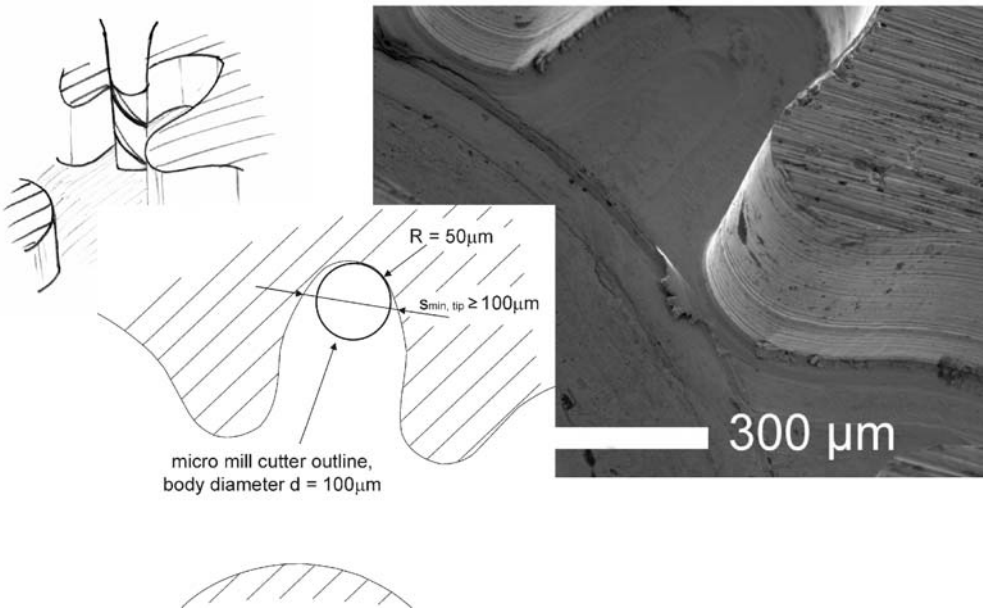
Rounding of component edges caused by the micro end mill cutter manufacturing the mold insert
